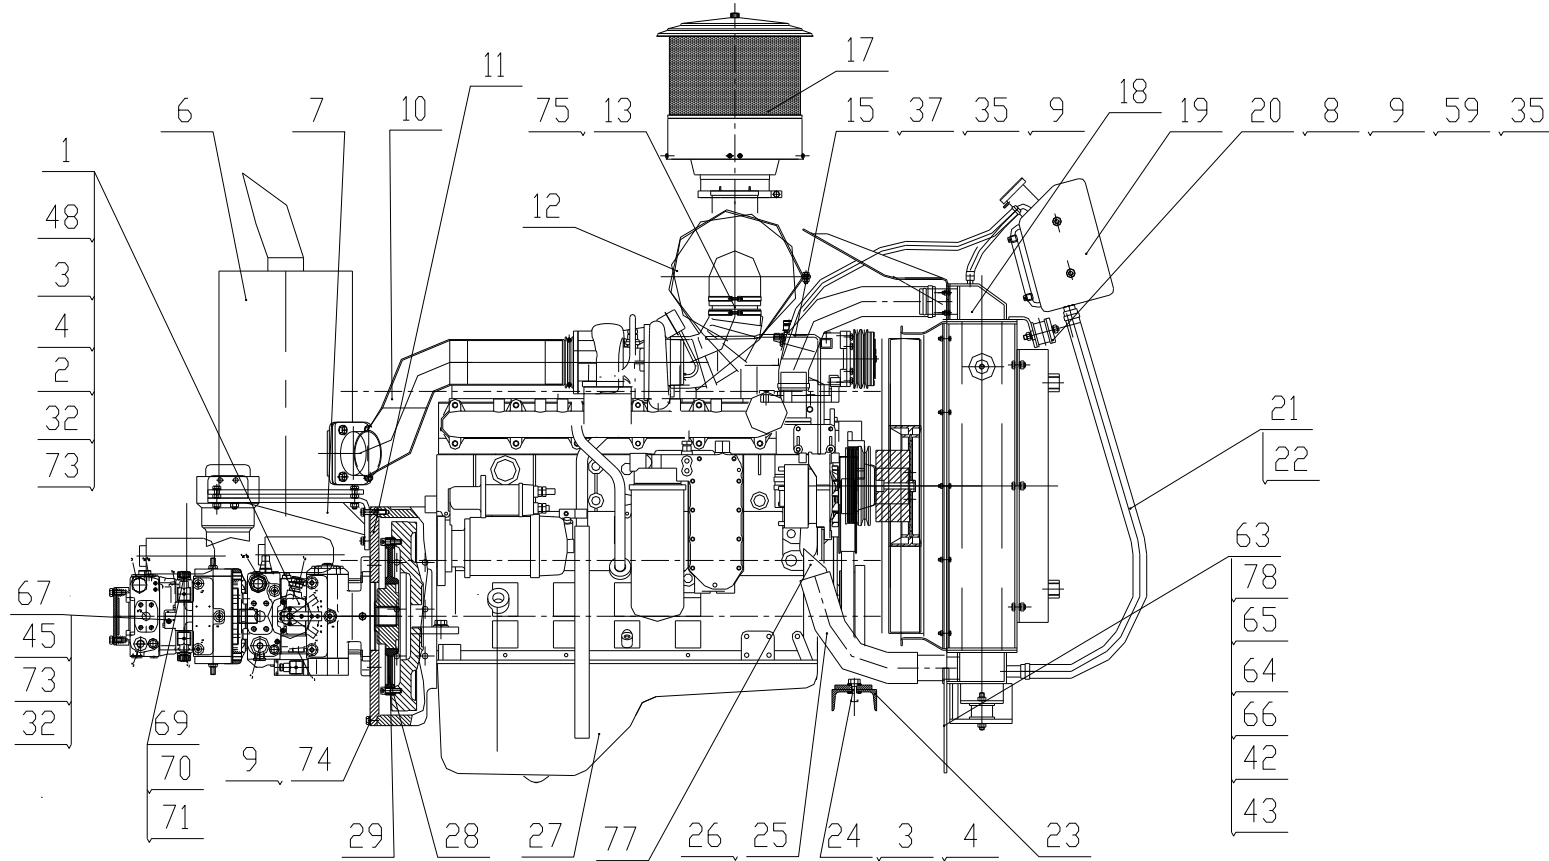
Engine system I (general) 发动机连接 一 (普通型)			Remarks
